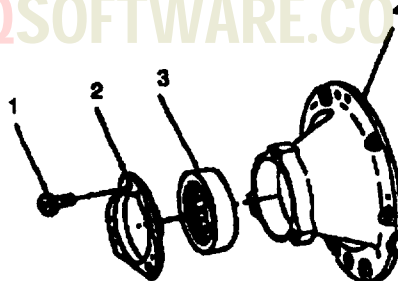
Power Shaft Bearing Retainer Assembly.
